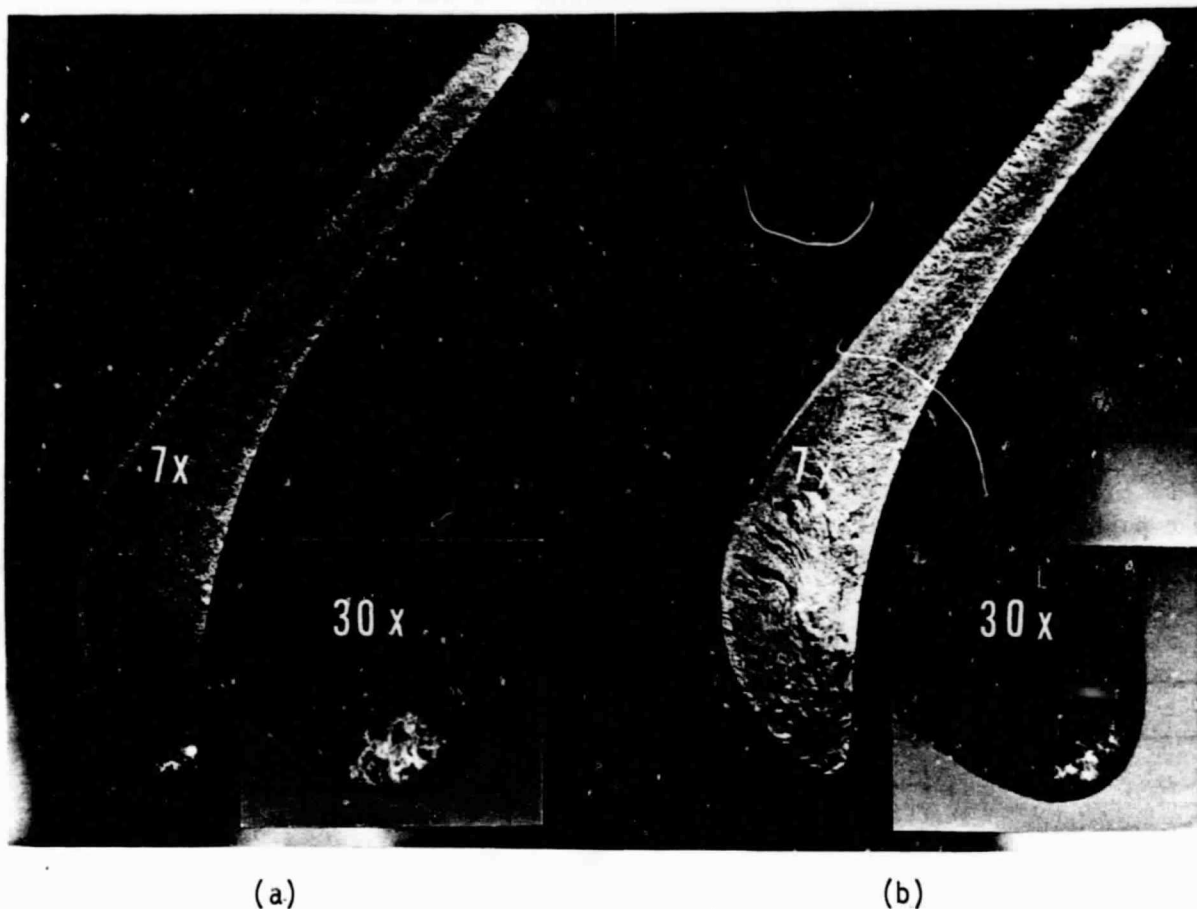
Typical Vane Flaws on Fracture Surface Not Observed on Vane Surface During "as-received" Visual Inspection. ACC Stator S/N 01089: (a) Vane #5; (b) Vane #19
